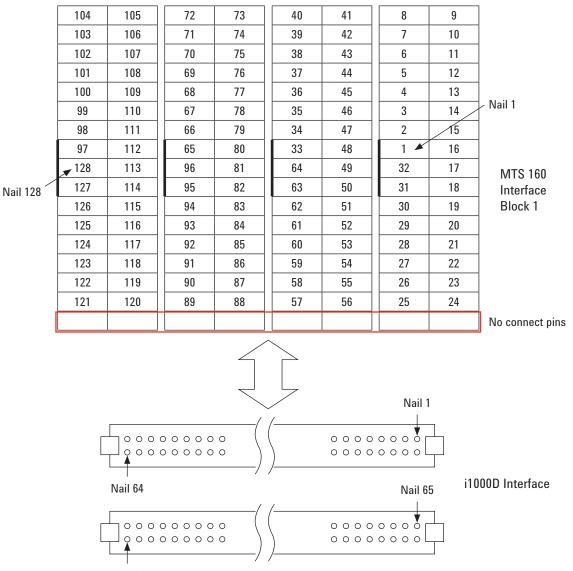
Back view of customized MTS 160 fixture adaptor where 64-pin flat cables are connected
